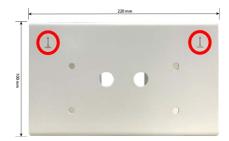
Dimensions Q71 Corner/Pole Mount - front view
